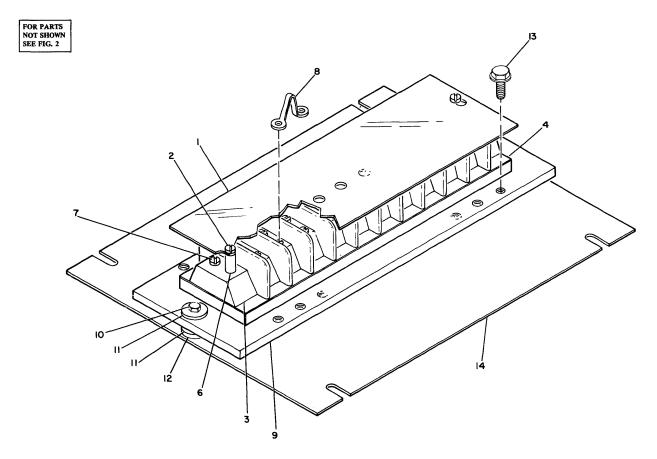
TERMINAL BLOCK ASSEMBLY. SEE LIST 14
